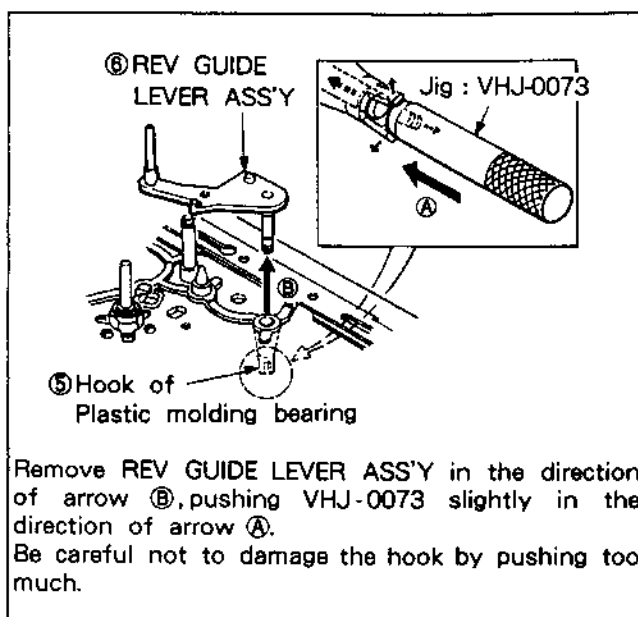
Method of Using the Jig VHJ-0073
